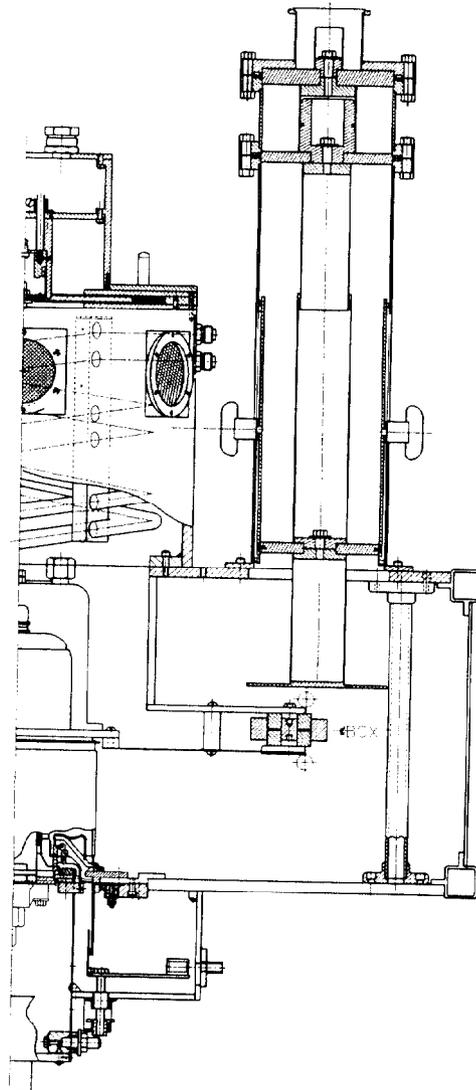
Scale drawing of the final cavity with the EIMAC 4CW25K tube installed.
